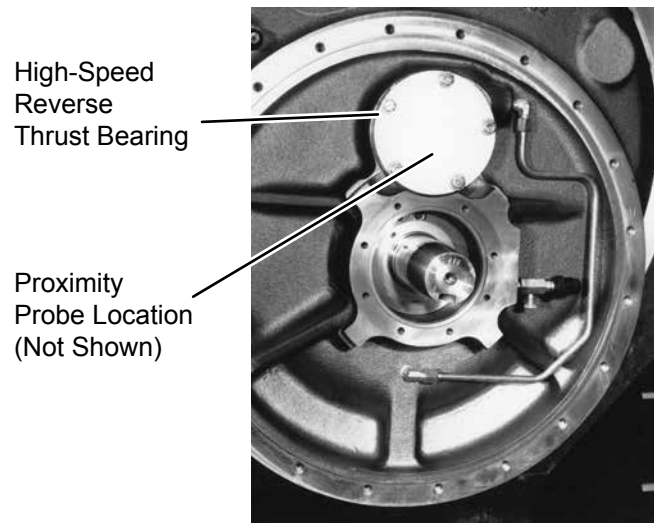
HIGH-SPEED BEARING COMPONENTS - REAR (H COMPRESSORS - DESIGN LEVELS A, B, & C; J COMPRESSORS)
